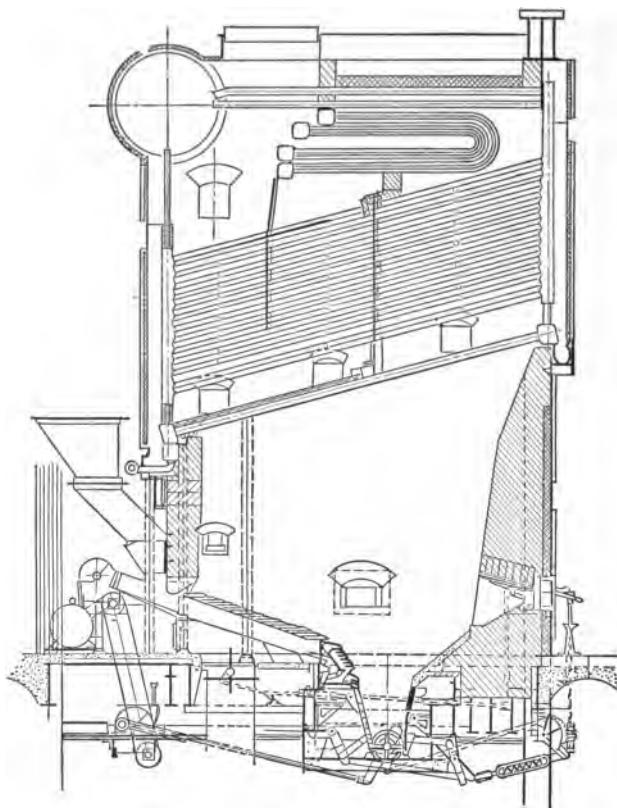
Boston Edison Stoker Setting, Showing Clinker Grinder and Furnace Control Mechanism Located at the Front of the Boiler.
